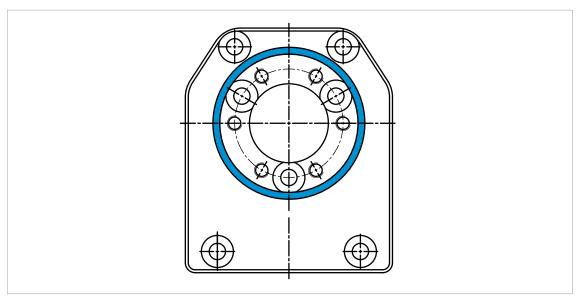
Front view of the motor flange A-side with radial groove (blue)
